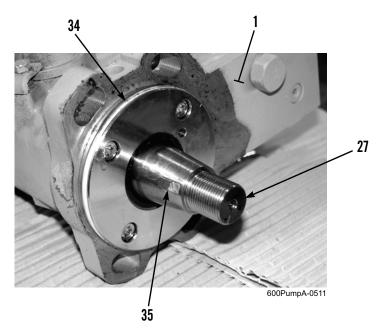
Fuel Injection Pump O-Ring and Woodruff Key.
